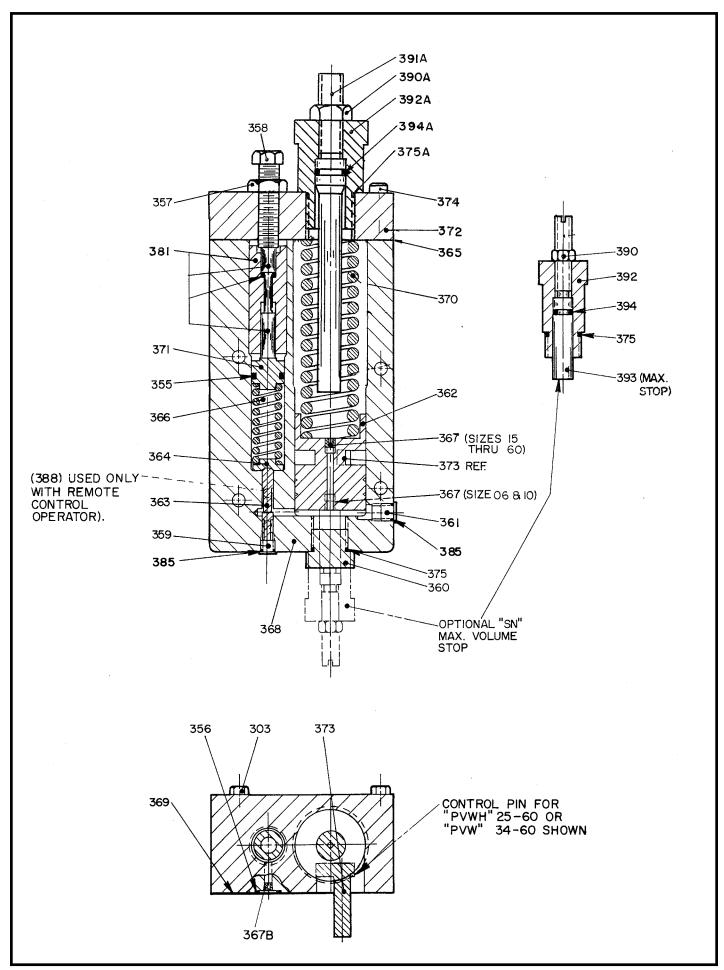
Parts Drawing, Oilgear Type "CH" Control (E51340).
